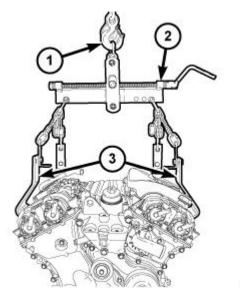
Lifting Sling, Engine Lifting Brackets & Engine Hoist Courtesy of CHRYSLER GROUP, LLC
